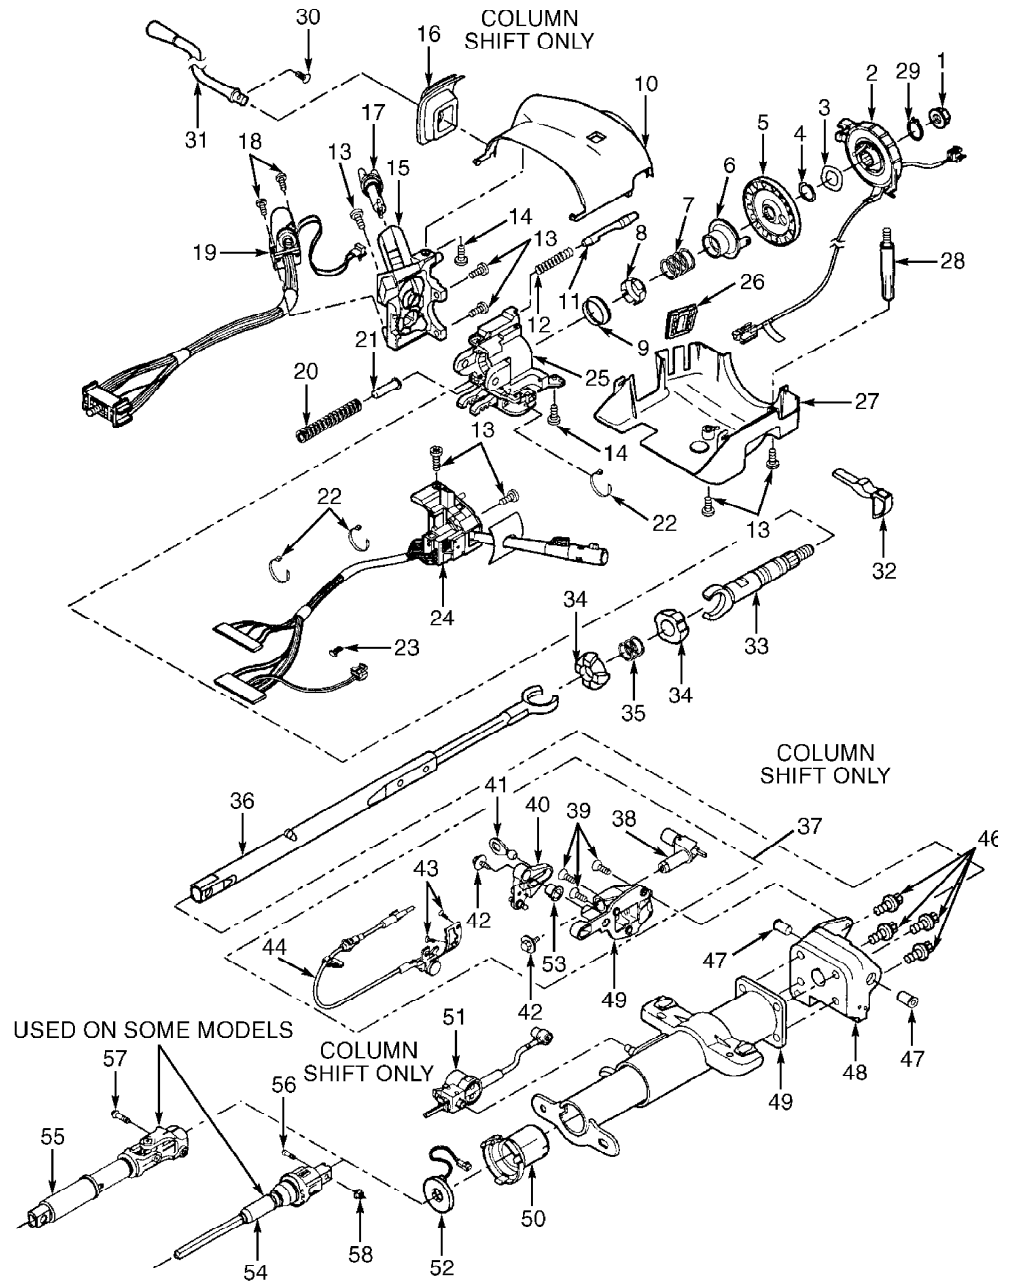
Exploded View Of Non-Tilt Steering Column (Typical)
